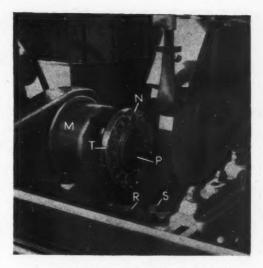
Equipment on a Jones-Shipman grinding machine for holding inner rotors during finishing operations on the periphery after skiving. Interchangeable location plates provide for holding front and rear units
